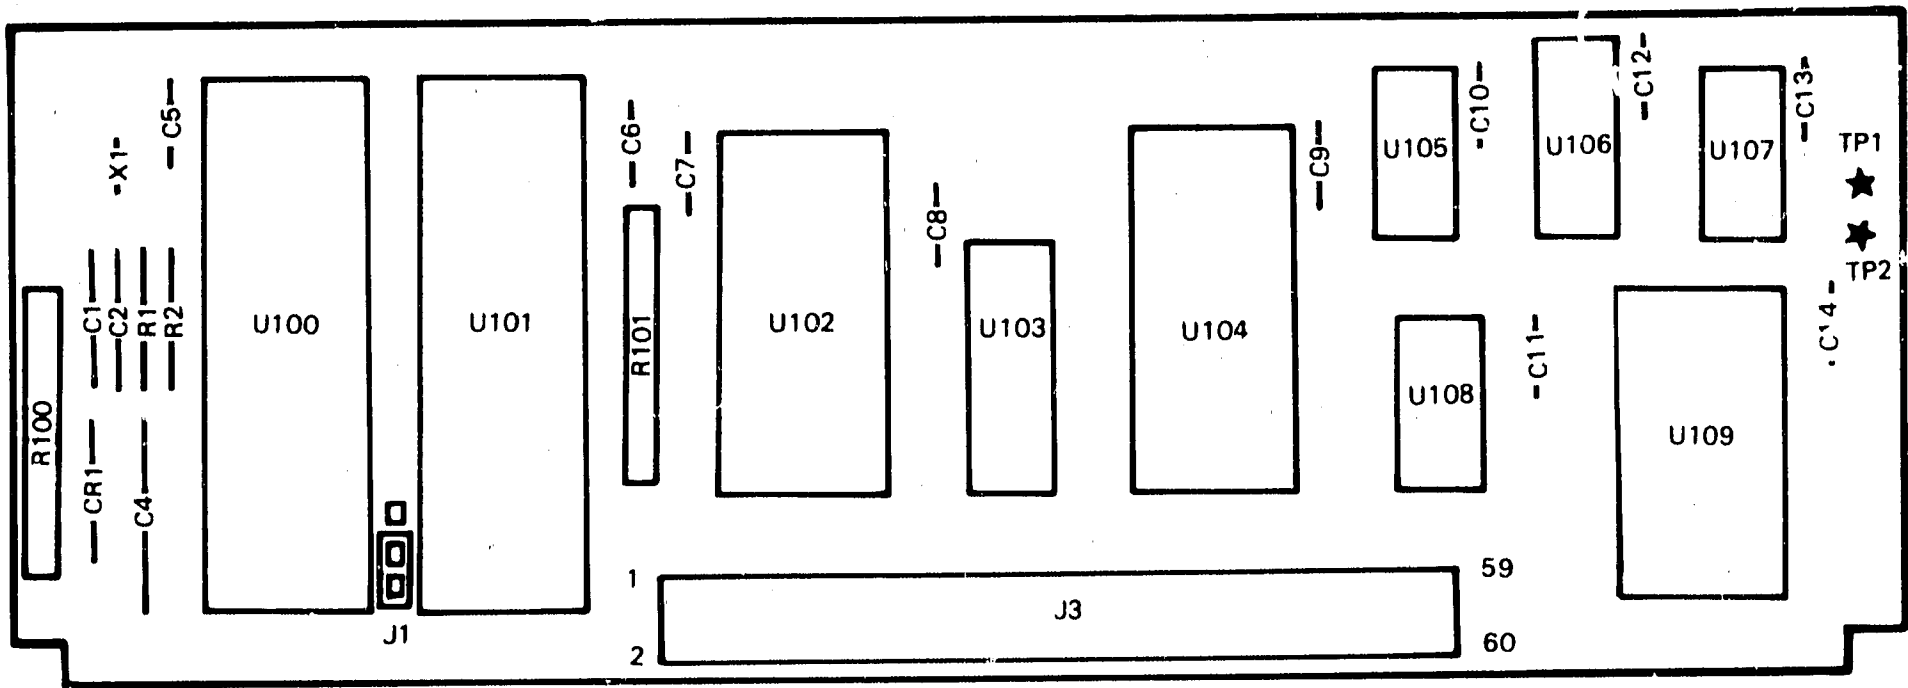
A3 Receiver Board Schematic (Sheet 3 of 4)
